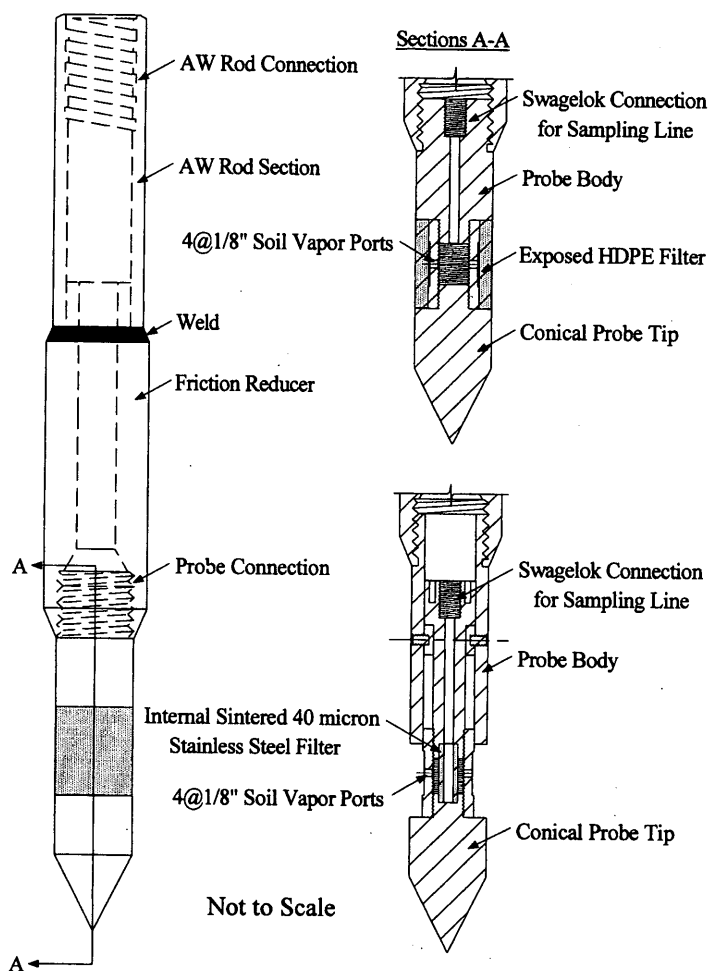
Stainless steel soil vapor probes with friction reducer and AW drill rod: top, HDPE filter probe; bottom, retractable probe with shield.
